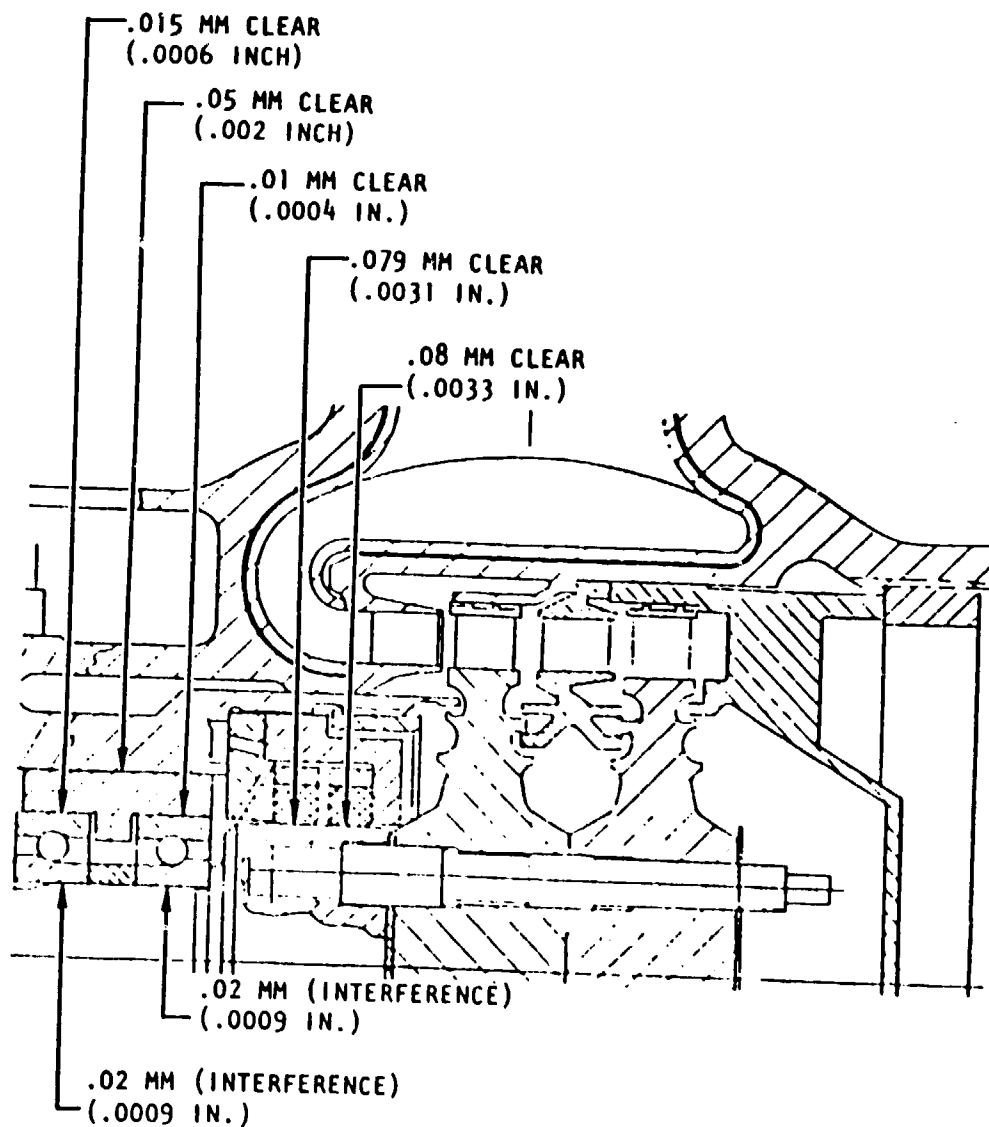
Turbine End Bearing and Seal Diametral Clearances
